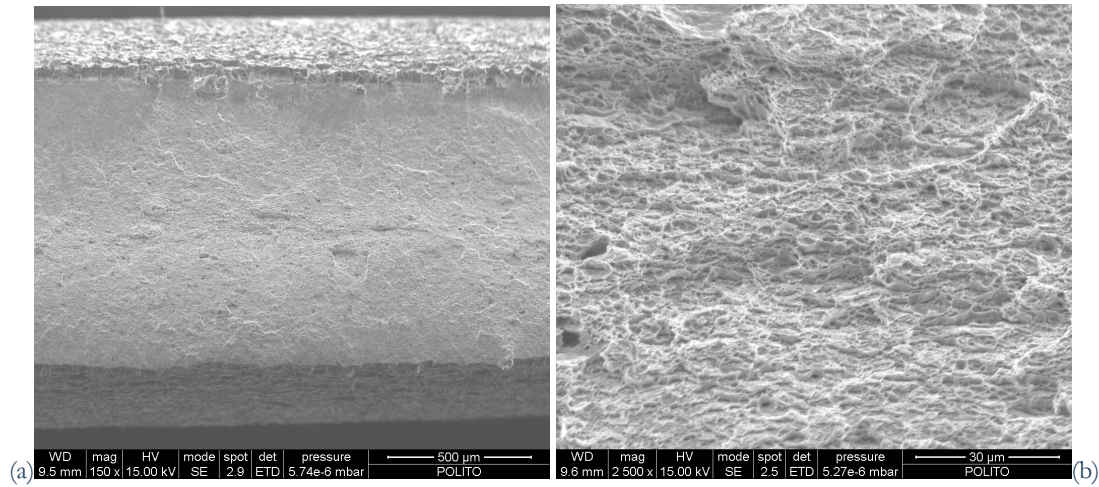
Fracture surfaces of TWIP/Mn-B welded joint. Fracture in the HAZ of Mn-B steel. Macroscopic (a) and microscopic (b) views.
